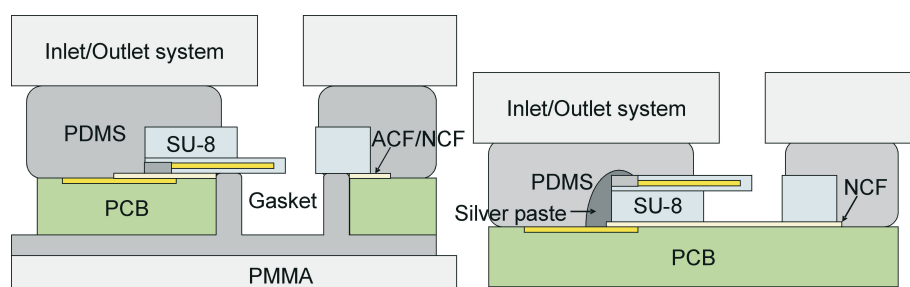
Left: Schematic drawing of the packaging system used for a flip chip bonded chip without a lid. Right: The packaging system for a chip without a lid that was interconnected using silver paste. This design was normally used for measurements in liquid. As seen in the image, the lower part of the channel walls was made from SU-8, while the part above the cantilevers was made from PDMS. Note that many of the packaging parts, were similar and could be used regardless of how the chips were electrically interconnected.
